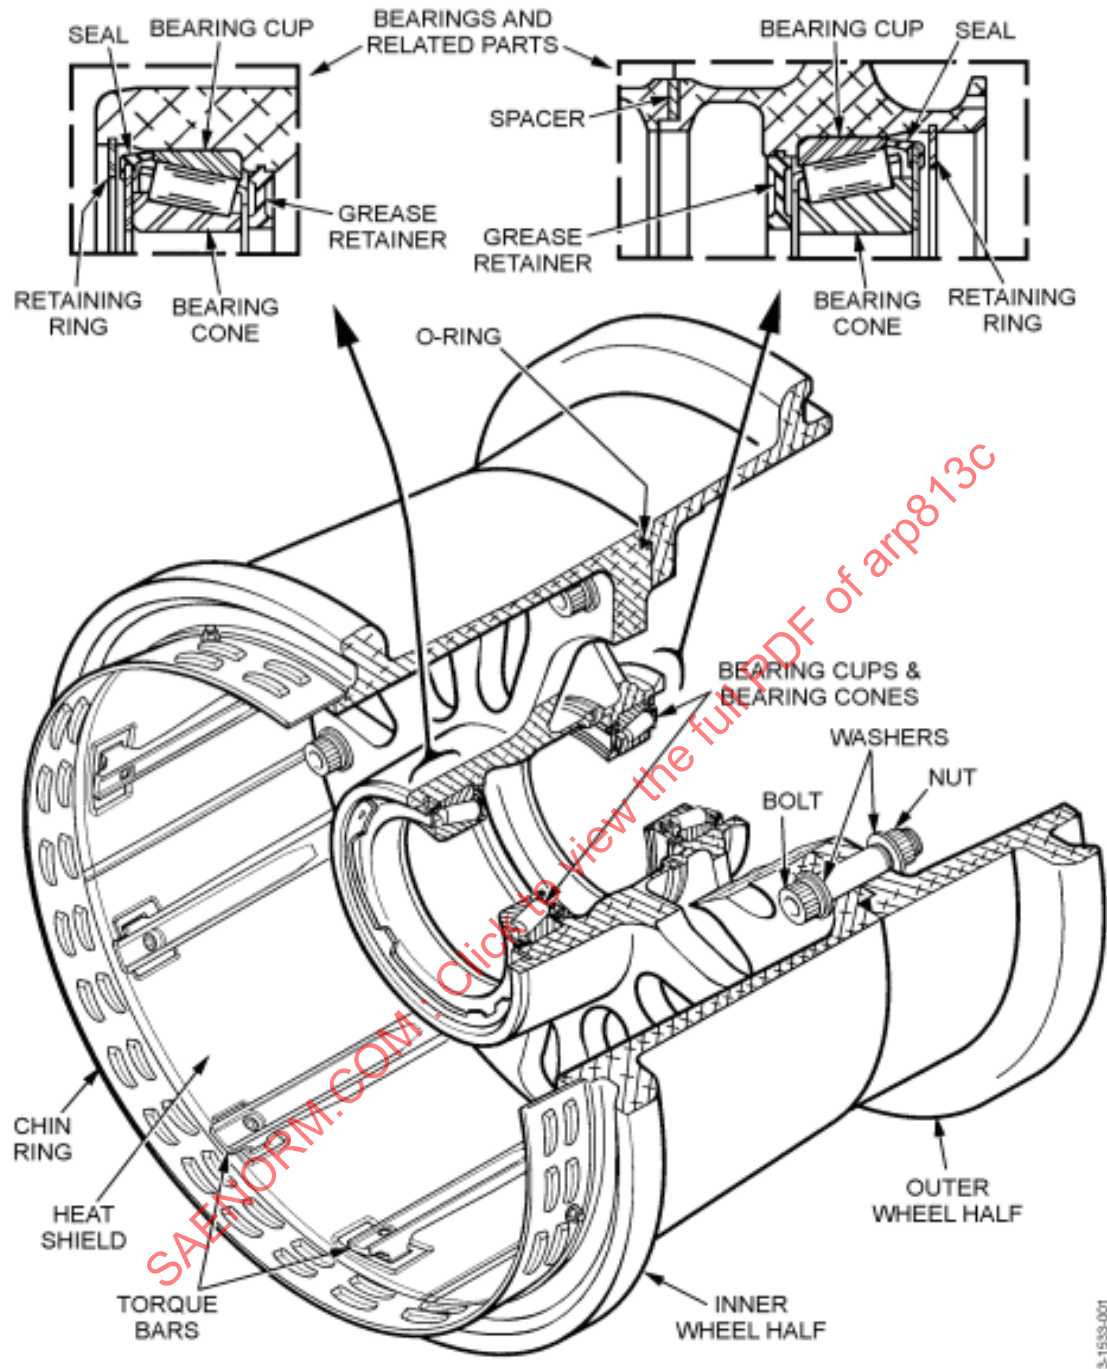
AIRCRAFT BOLTED WHEEL NOMENCLATURE
